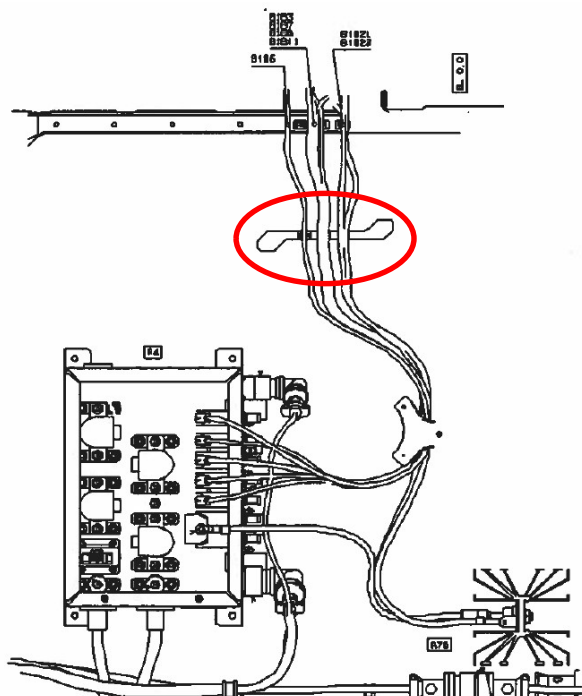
A detail excerpt from the "Completion and Finishing of Power C/A Card" showing the power cable routing on the right strip assembly (red circle). (Courtesy of Leonardo, modified by NTSB)
